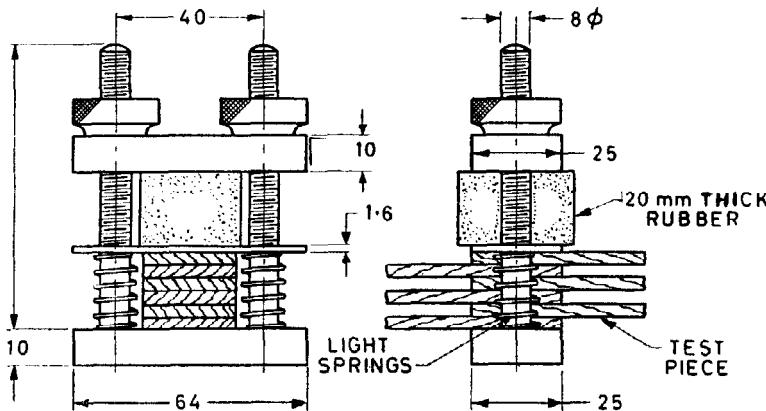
CLAMPING DEVICE FOR HOLDING SIX TEST PIECES
